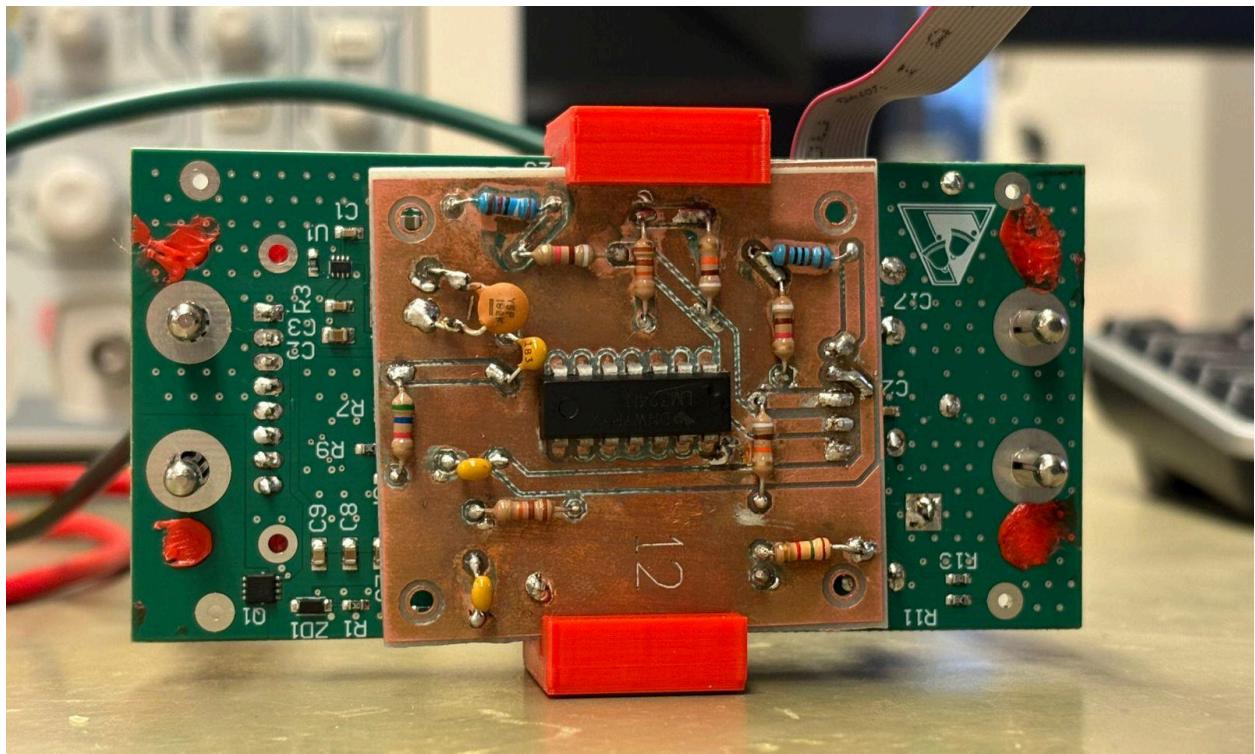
Back side of the assembly showing the DA3 PCB mounted to the main motherboard.
